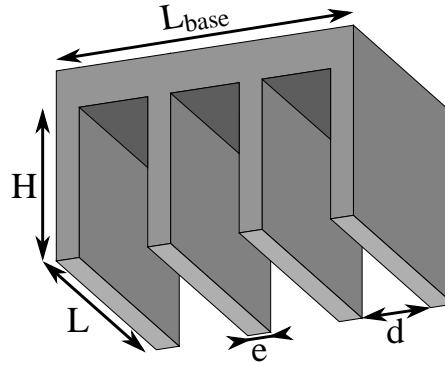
Drawing of a straight fin heatsink with dimensions used in heat transfer models.
